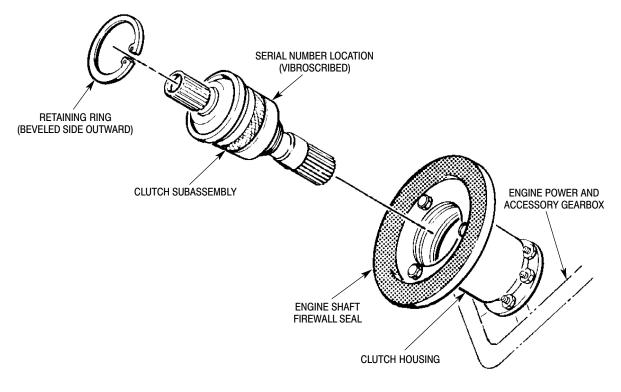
Inspection of Overrunning Clutch Assembly Outer Race.
